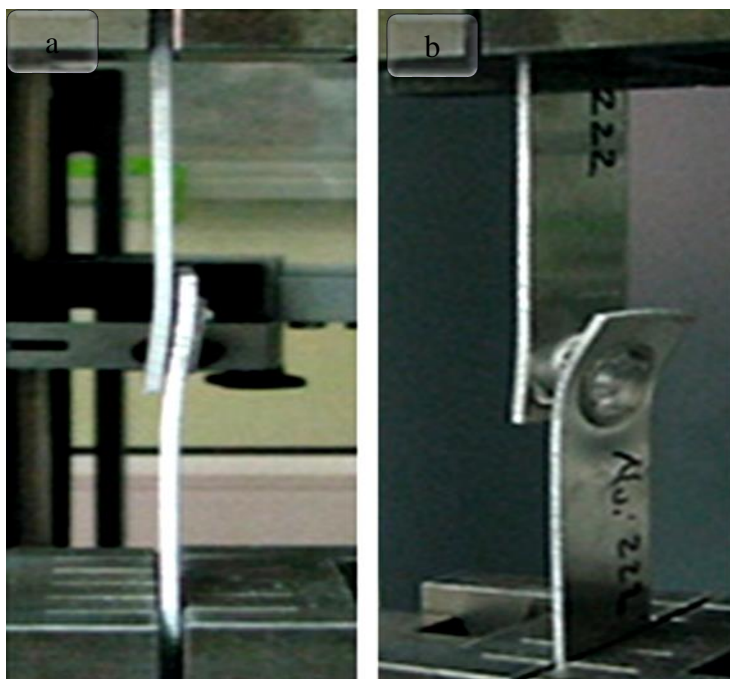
Dissimilar FSSW joint Lap-Shear Tensile Test for Sample Set A & B: (a) before the Test (b) after the Test
